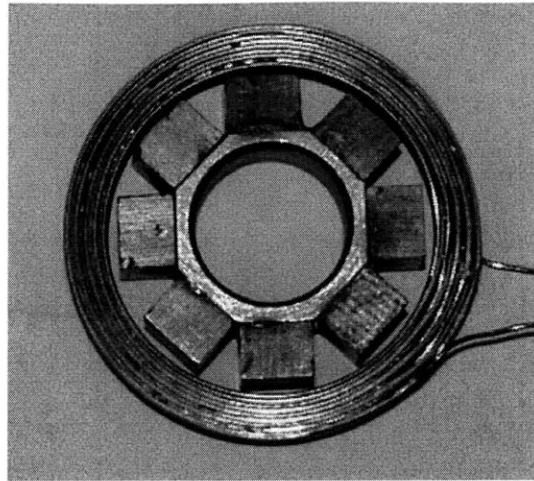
The linear motor magnet ring is shown inside the linear motor coil. This picture is similar to a cross-section of the assembled motor.
